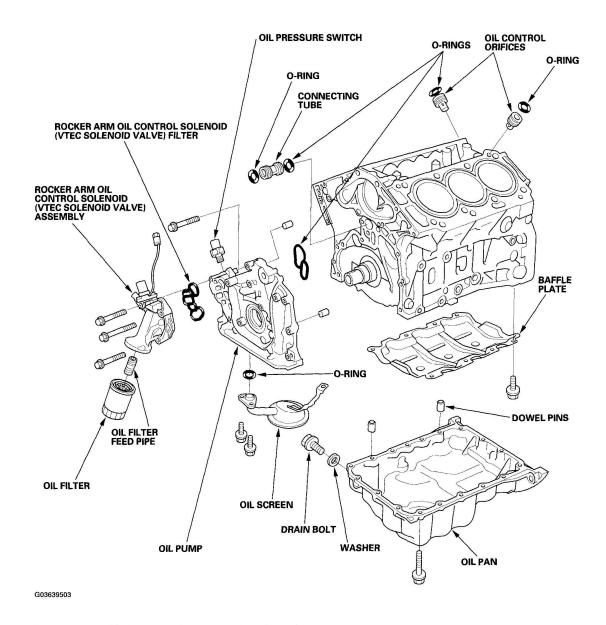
Identifying Engine Lubrication Components Courtesy of AMERICAN HONDA MOTOR CO., INC.
